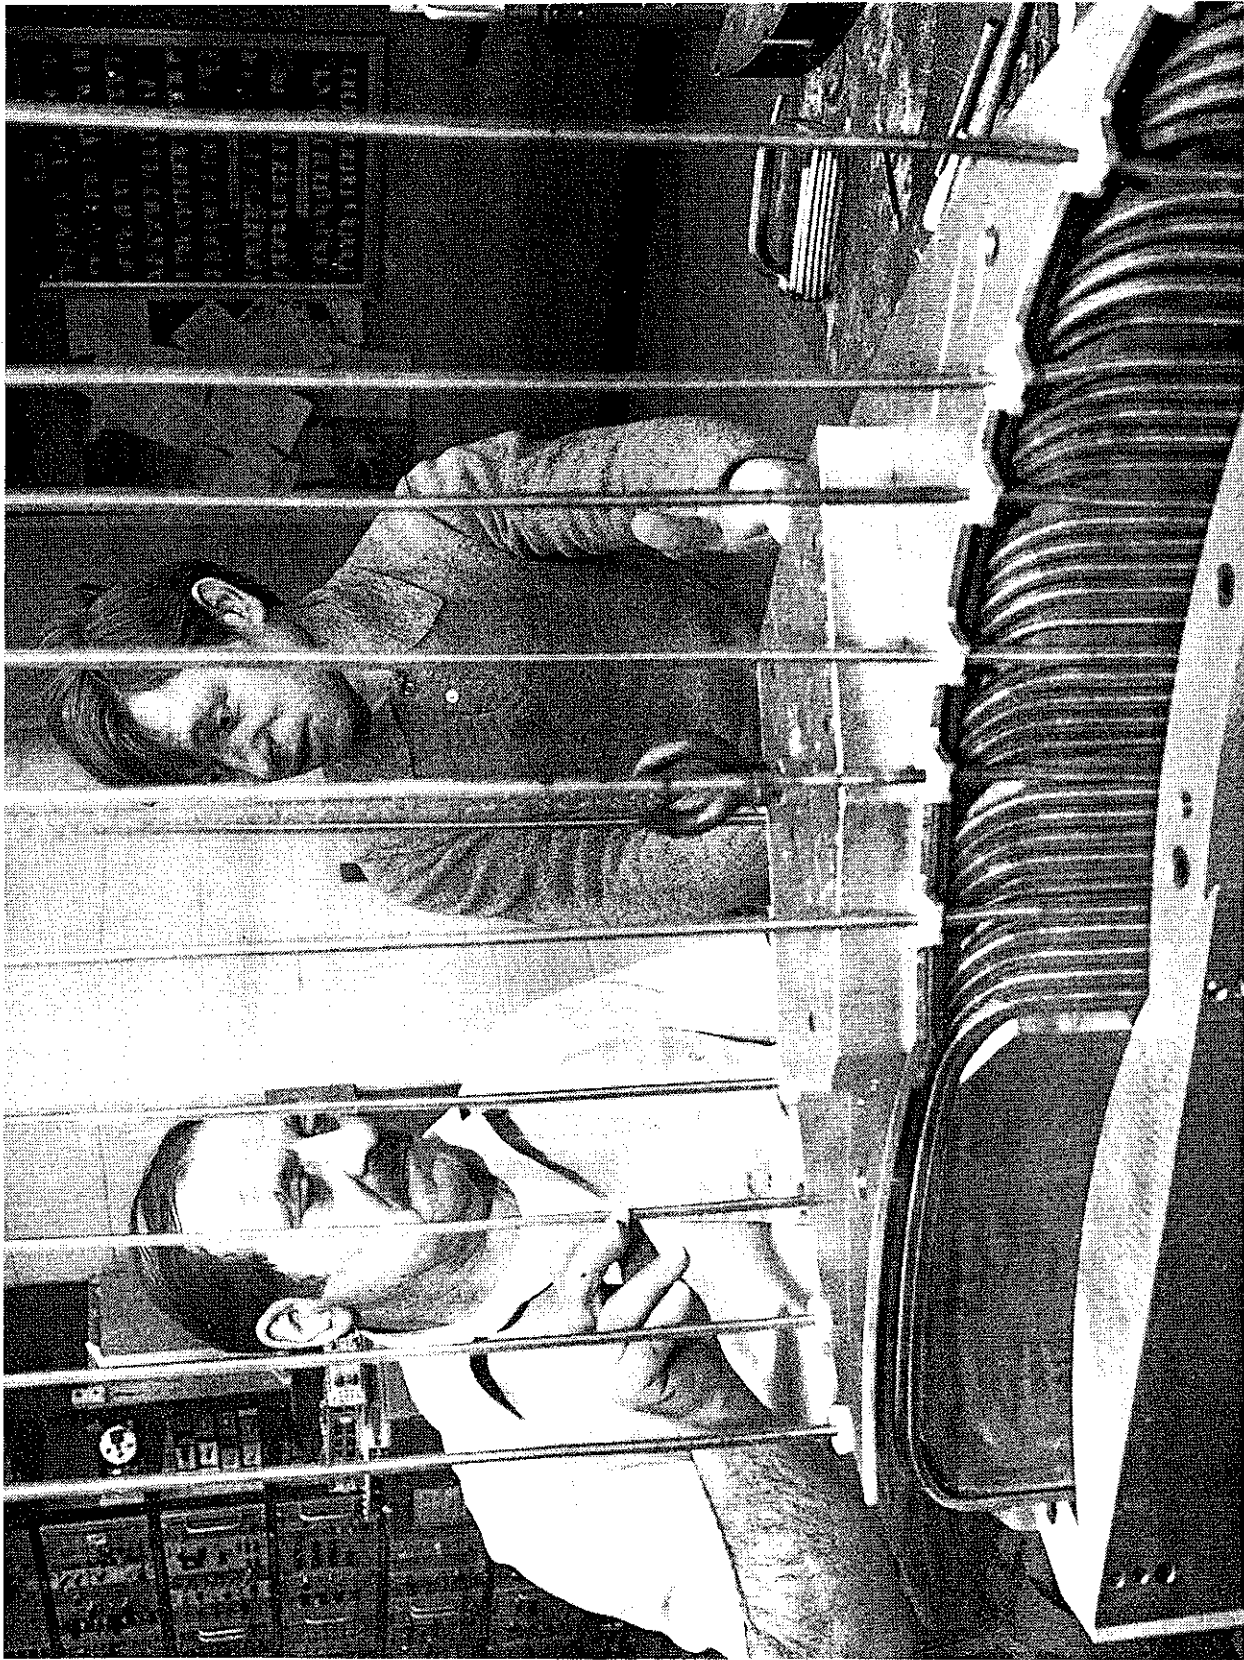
An outer pole tip section with its seven trimming windings as it is being lowered into the vacuum potting fixture.
